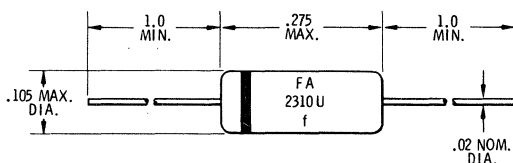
BRIDGE PACKAGE DIMENSIONS.
